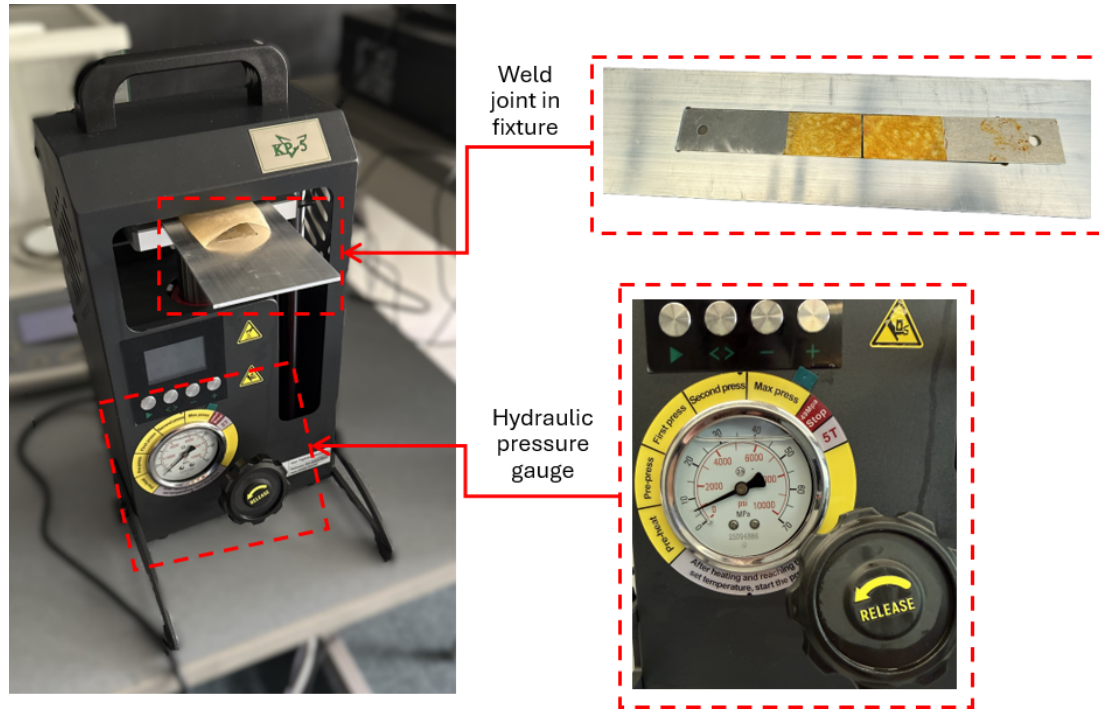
KP-3 Hydraulic press with weld sample, "open-face" self-weld sample in alignment fixture, and pressure gauge
